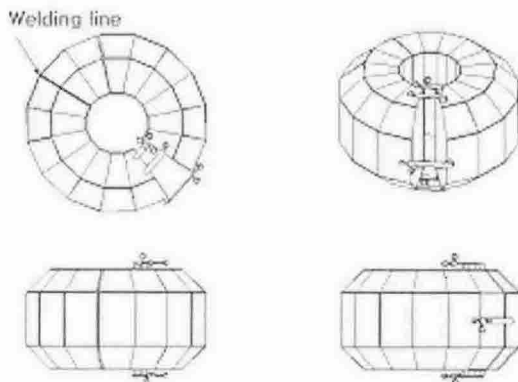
Mock-up vacuum vessel with 1/3 scale. 15 sectors was assembled and each sector had 22.5 degree in toroidal direction. Mock-up had 22.5 degree opening at the opposite side of the site welding line and these opening was used to measure the welding distortion with dial gage.
